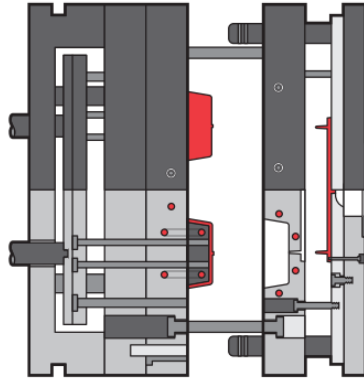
Schematic of a two-cavity, three-plate mold with cutaway view showing second stage of opening.
